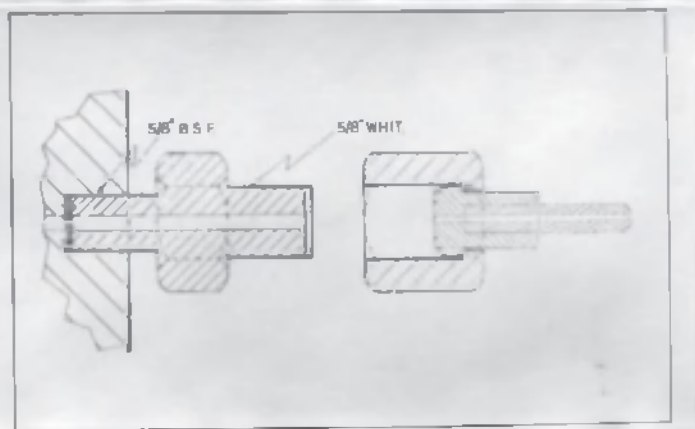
Nipple and Union attachment; alloy steel for hot parts, mild steel for cold.
